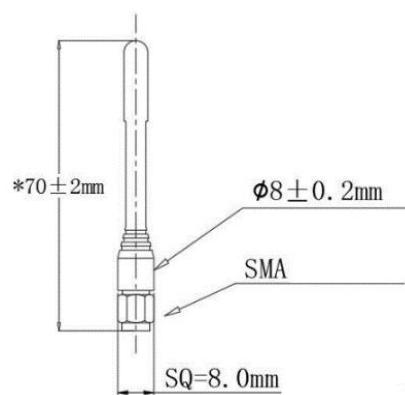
Dimensional drawing of CE: 433MHz antenna 1
